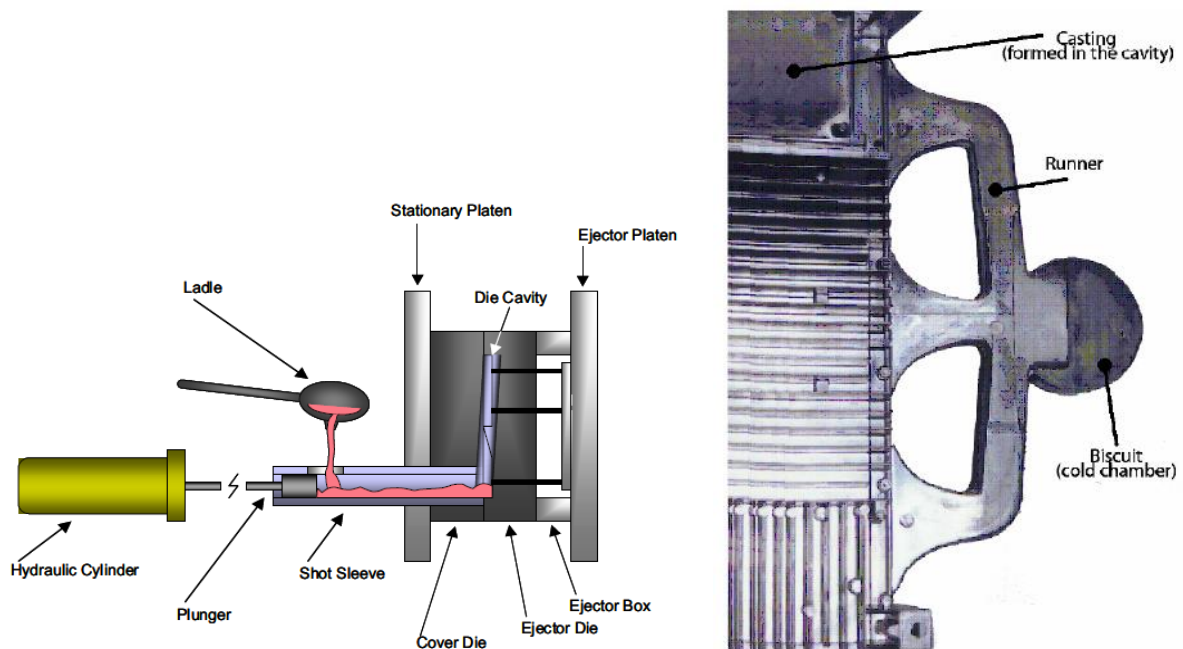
Left: Schematics of a conventional HPDC cold chamber machine [14]; Right: Typical layout of a component produced by a cold chamber machine [15].
